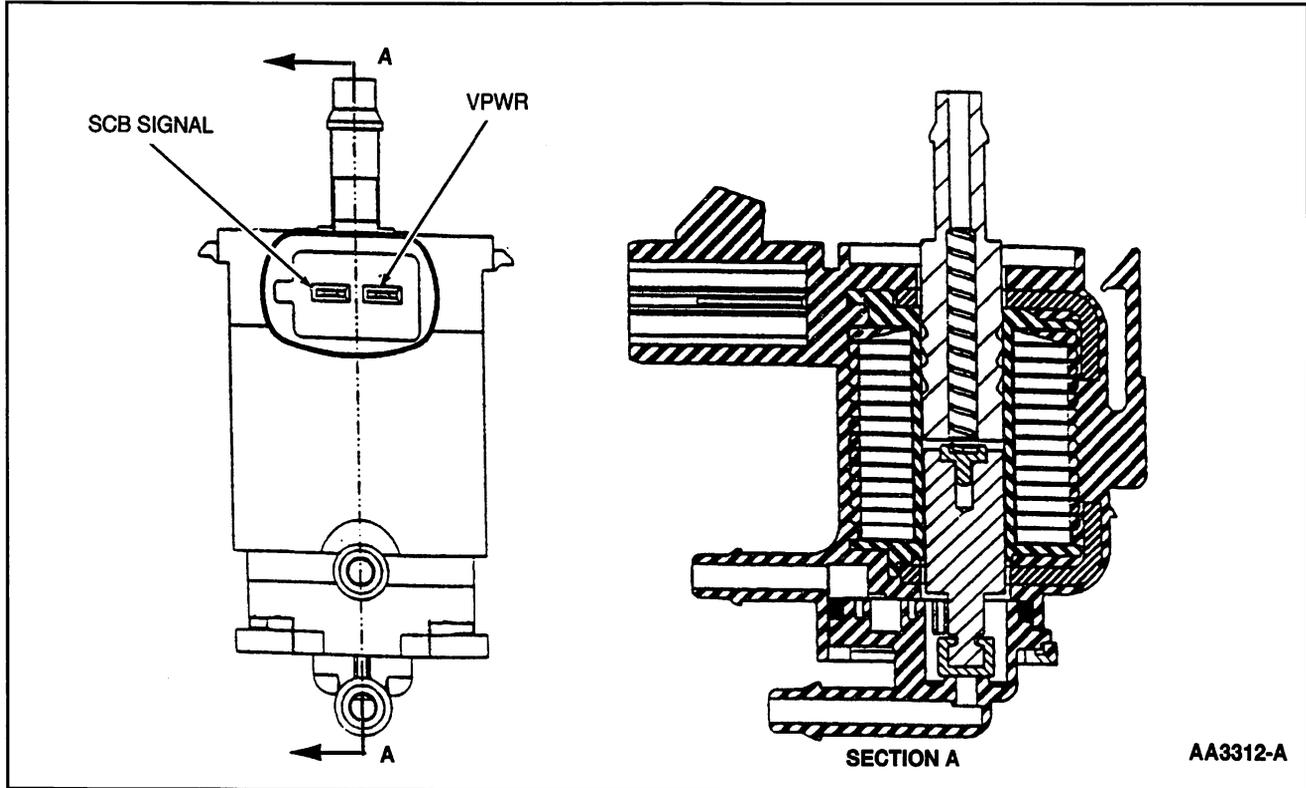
Supercharger (Boost) Bypass Solenoid (Thermactor Air Control Solenoid/Valve Assembly)
